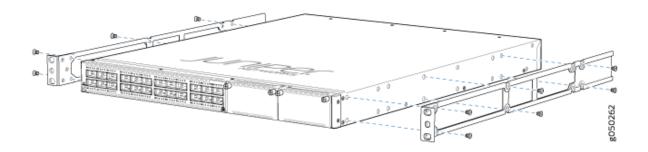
Attaching Mounting Rails to the QFX5100-48S
